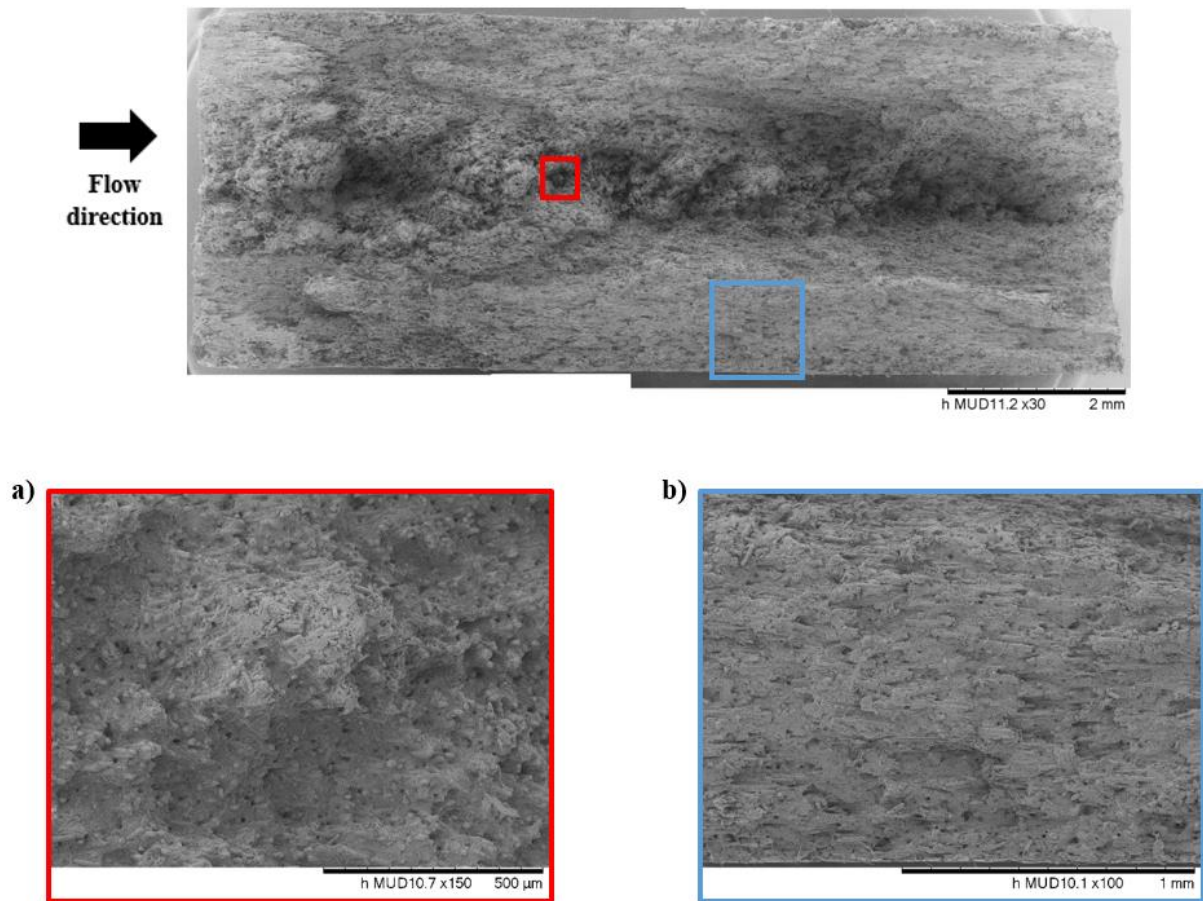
Fracture surface of a fatigue 90° specimen at room temperature
